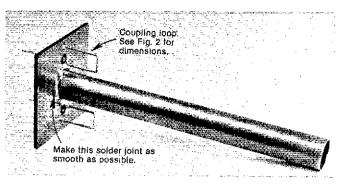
This photo shows the finished tube support assembly with both coupling loops in place. Make sure the solder joint at the base of the tube is as smooth as possible.
